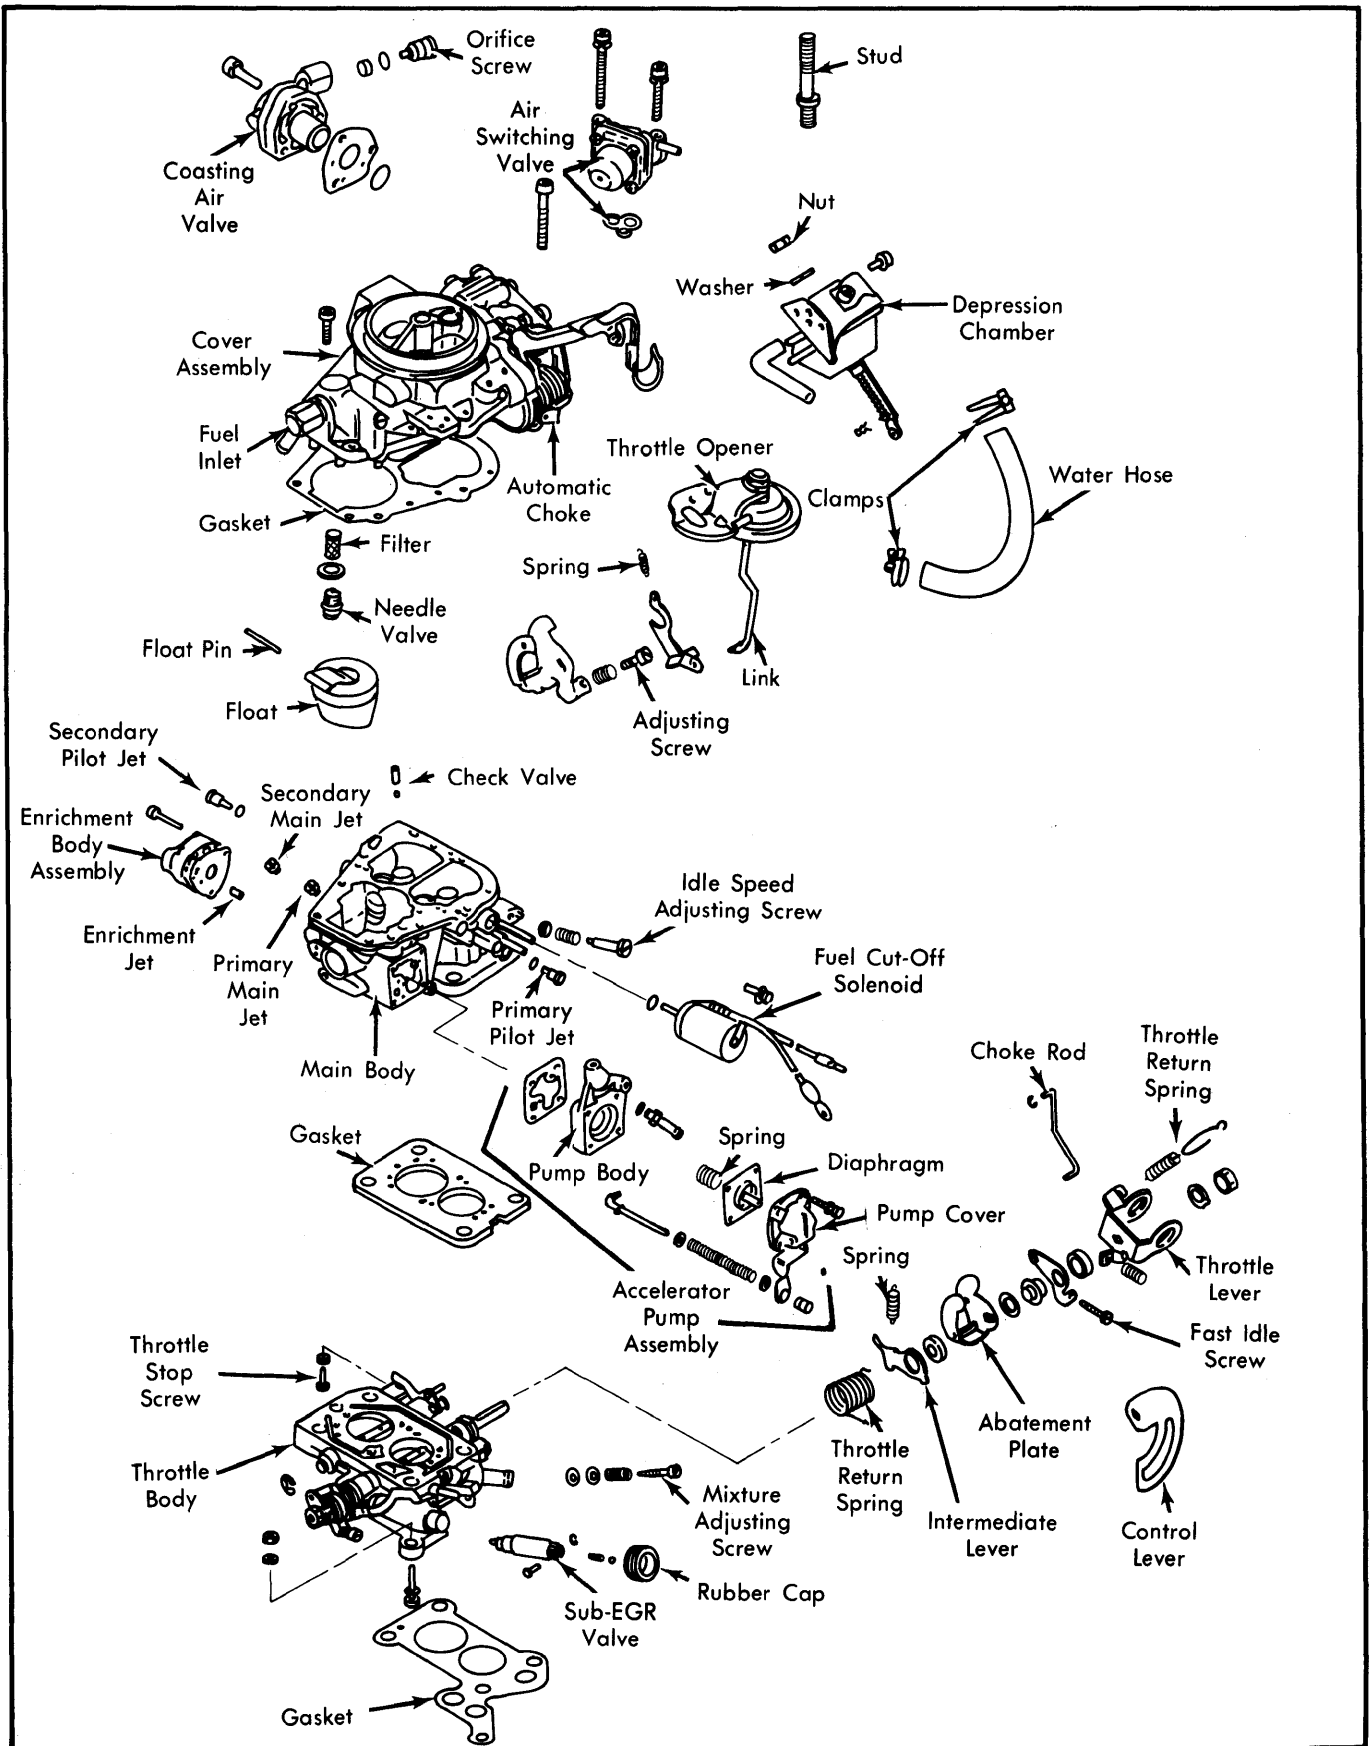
Exploded View of Solex (Mikuni) DIDTA 2-Barrel Carburetor
